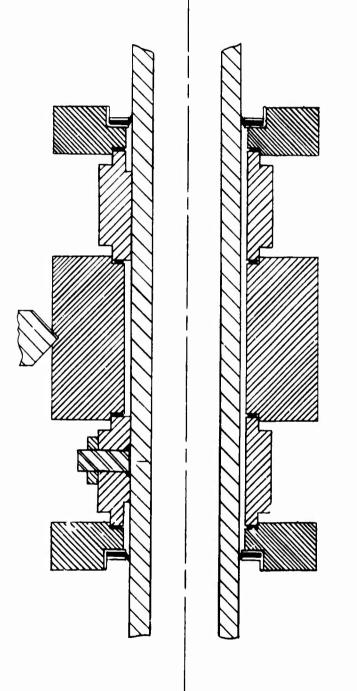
Cross section of the concentric recoil bearing test assumbly.
